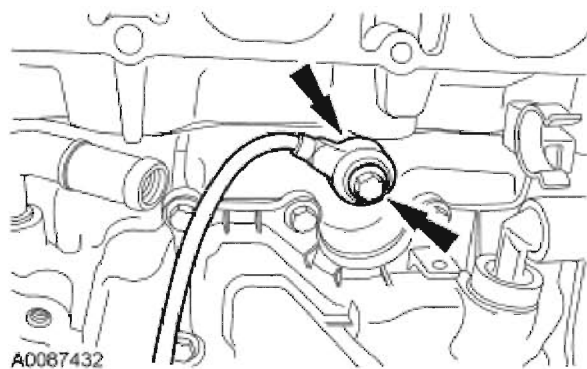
Locating Coolant Hose (2 Of 3)
